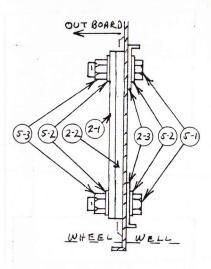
Mounting Cross Section - Primary installation on right side of nose wheel well. View Looking Aft.
